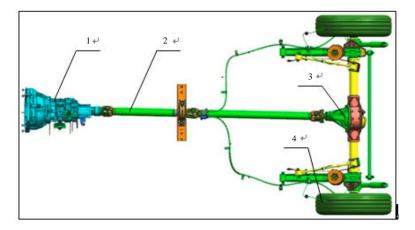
overall structure of mini-car driveline. (1) Transmission, (2) Universal joints, (3) Drive axle and (4) Driving wheels
